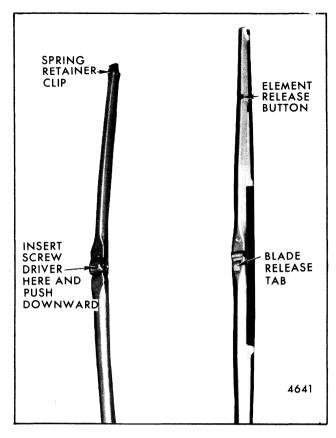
Wiper Blade Assemblies wiper arm and blade assemblies. On "B", "C", "D", and "E" styles, remove arm and blade assembly only from the transmission to be removed.
